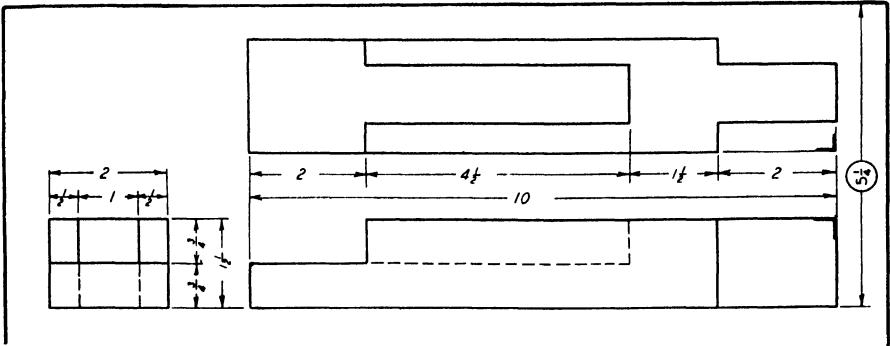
Prob. 368. Draw the views given and make an isometric drawing of the *extension bar*. Long axis horizontal, Art. 12-11.
